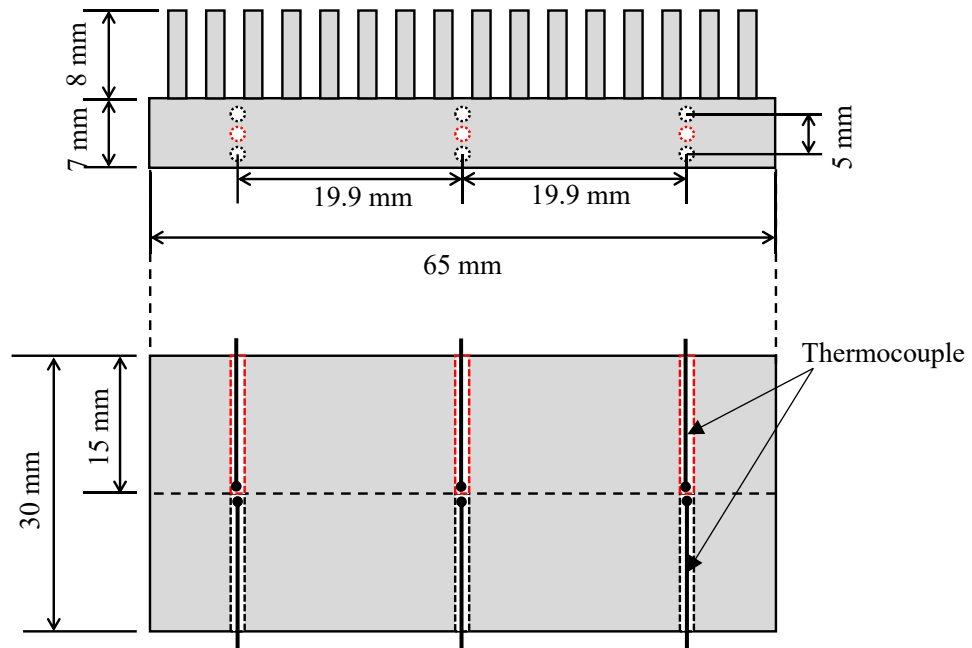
Detail of finned heatsink used in boiling experiments (Side view and Bottom view)
